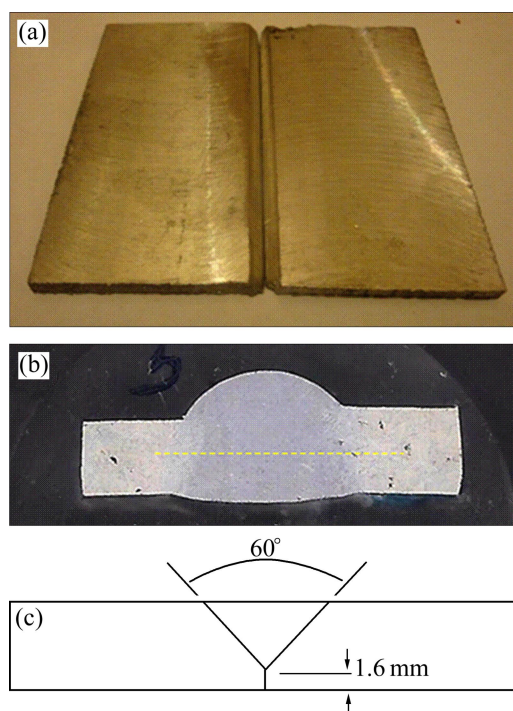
Photograph of plates and groove before welding (a), macrograph of real cross section of weld (b) and schematic illustration showing dimension of groove (c)
